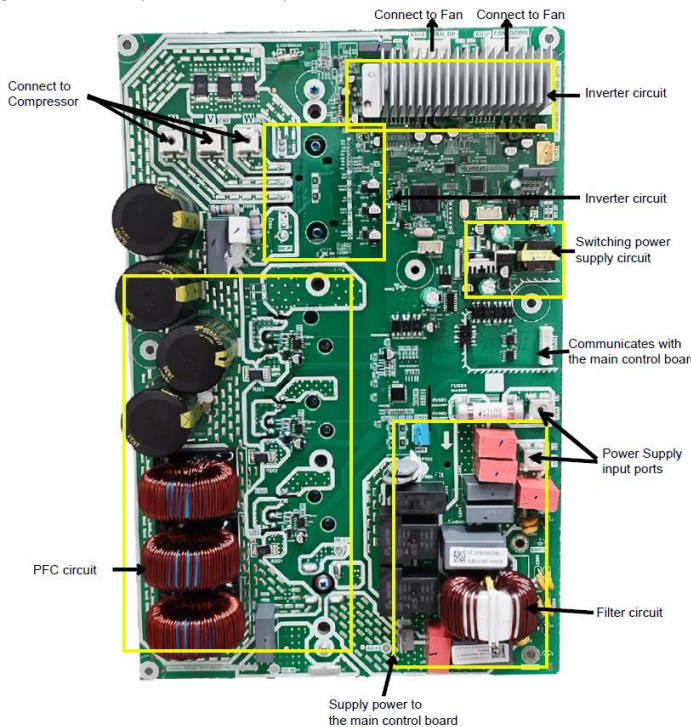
2.5/3.0ton compressor & Fan drive board of 35A
